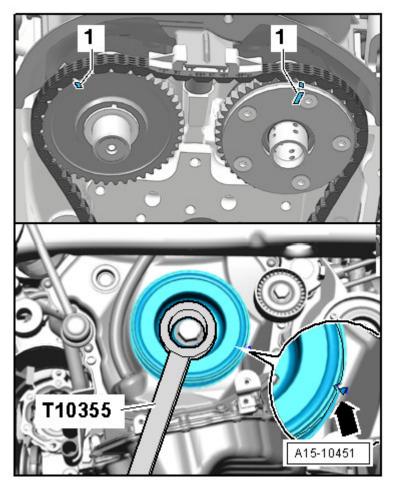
Identifying Markings -1- On Camshafts Aligned To Point Upward
